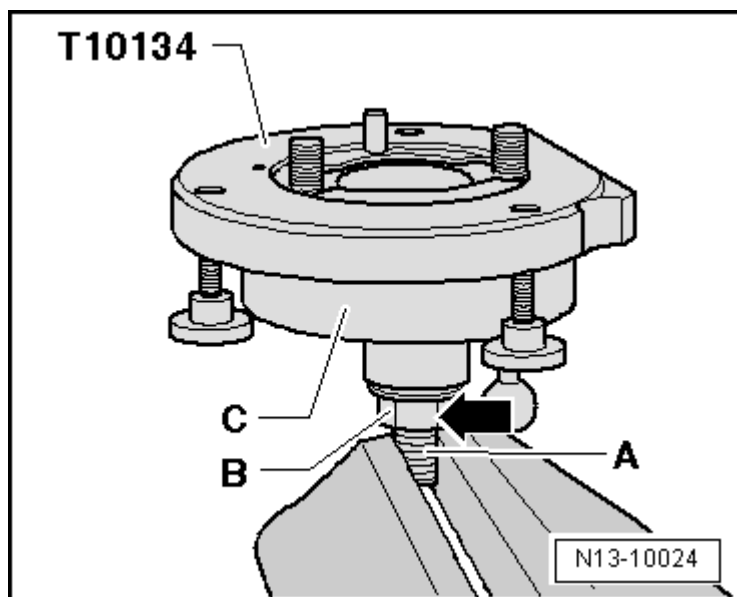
Identifying Tensioning Assembly Tool T10134 In Vise To Tension Surface Of Threaded Spindle
